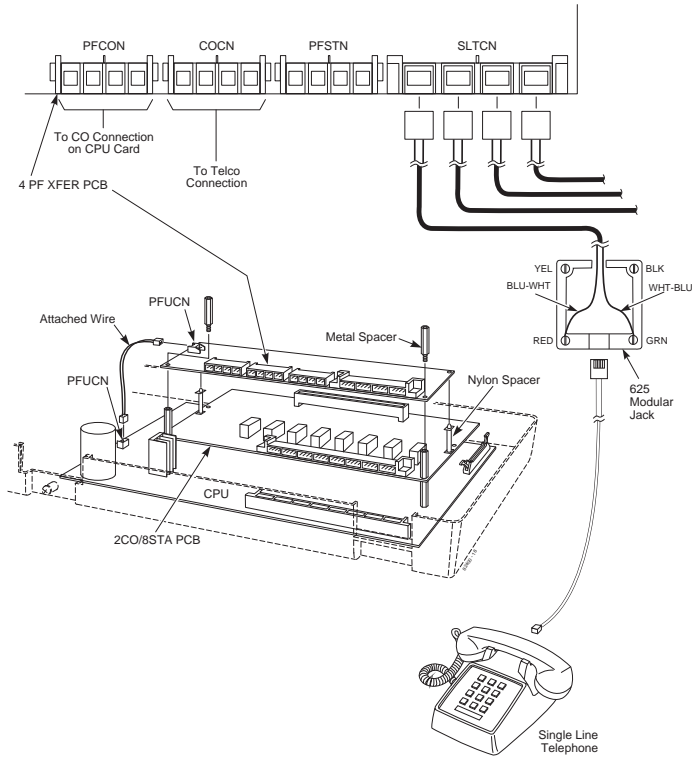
POWER FAILURE (4 PF XFER) PCB
